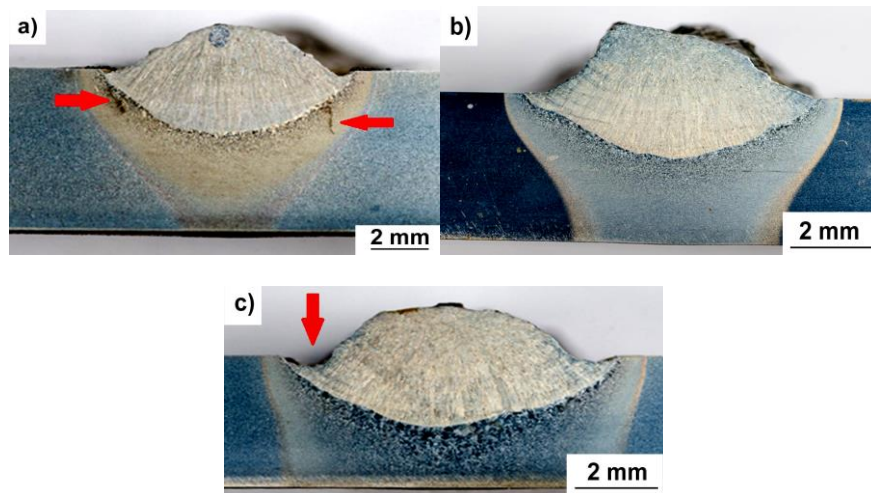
Exemplary macrographs; a) Specimen 1 – cracks in HAZ, b) Specimen 2, c) Specimen 3 - undercut
